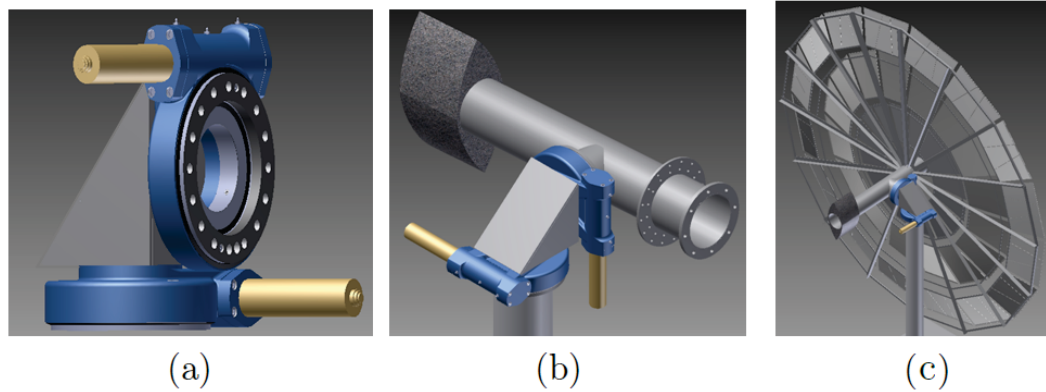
CAD drawings of (a) the proposed dual-axis pivoting slewing actuator mechanism with DC motor drive assembly, (b) actuator system fitted to the pedestal, and (c) solar concentrator dish with dual-axis actuator and pedestal system assembly.
